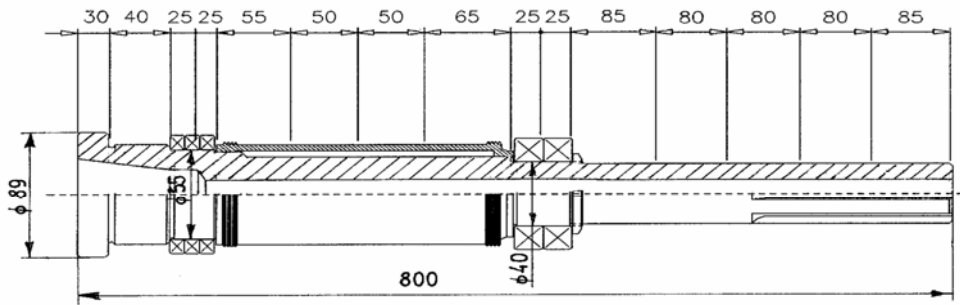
Experimental model of main spindle assembly with ball bearings with angular contact
